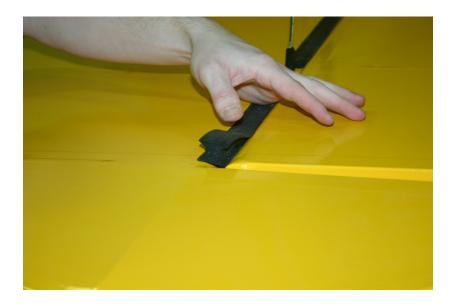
Installing Elevator Gap Seal Between the Outboard Hinge and the Horn
